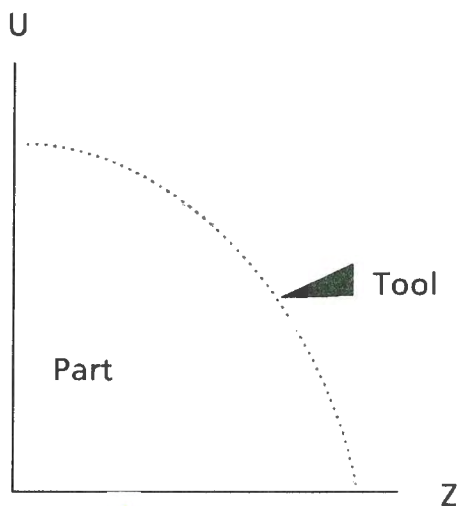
CUTTER PATH GENERATED BY U-HEAD
